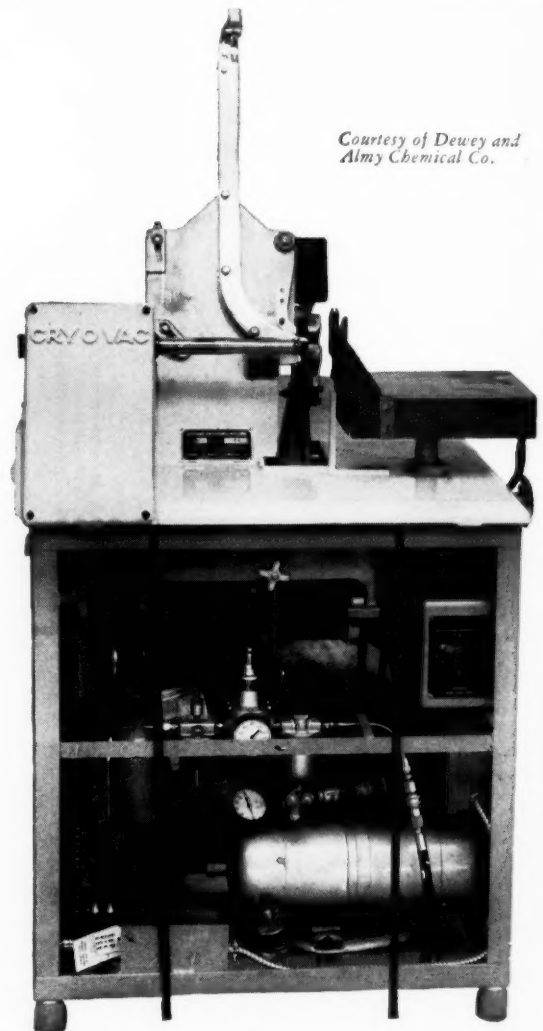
Packaging Machine which vacuumizes, twists and seals bags.
